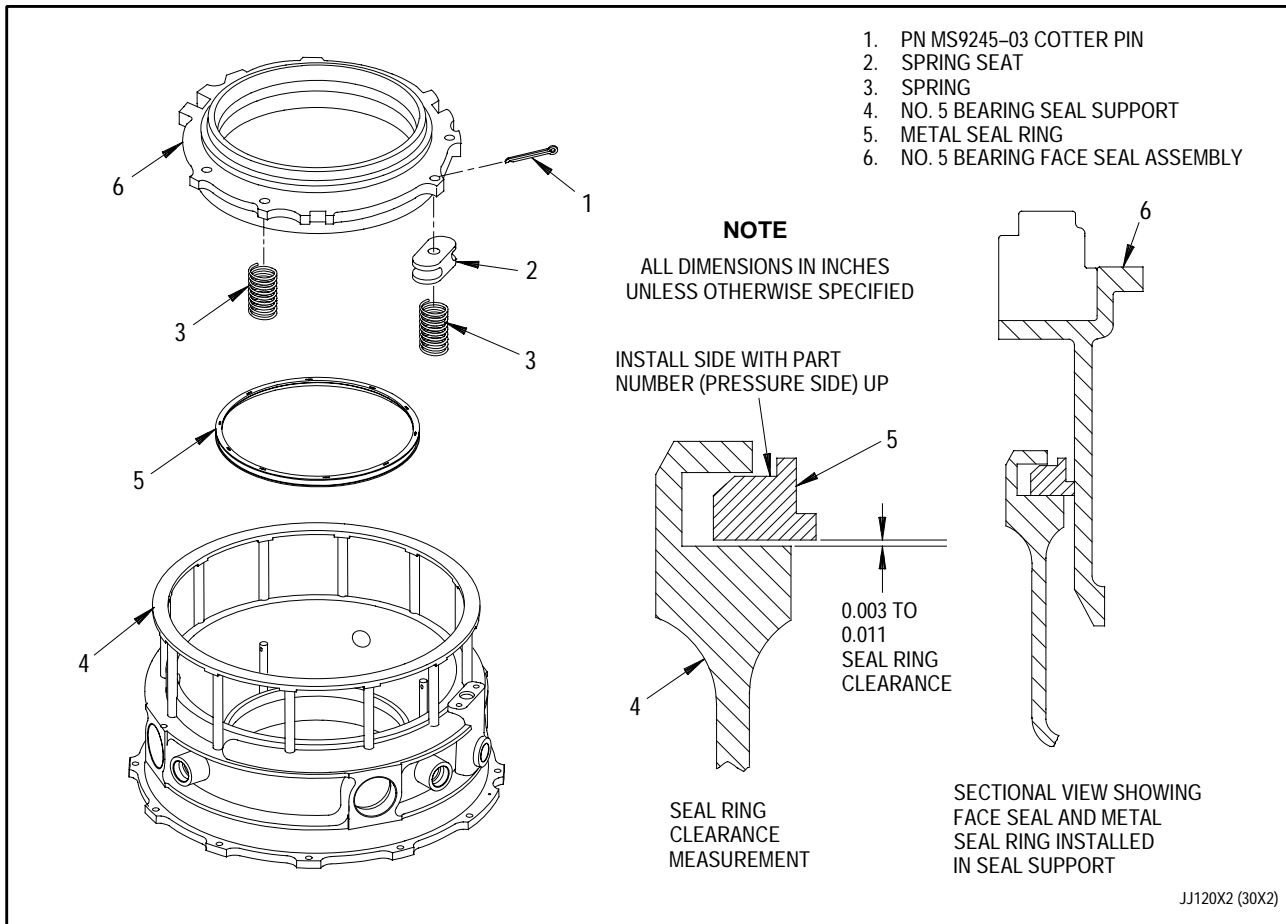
No. 5 Bearing Face Seal (Rear Seal) Assembly - Installation
